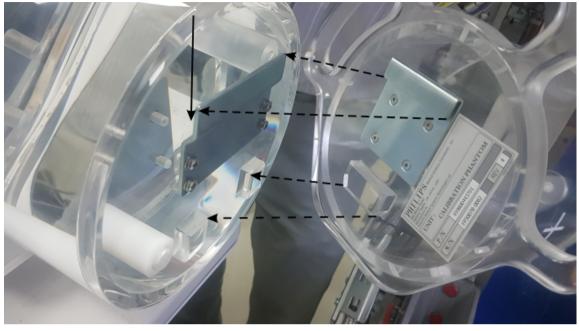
Physics Section to Harmonized Body Section Assembly Alignment Slot
